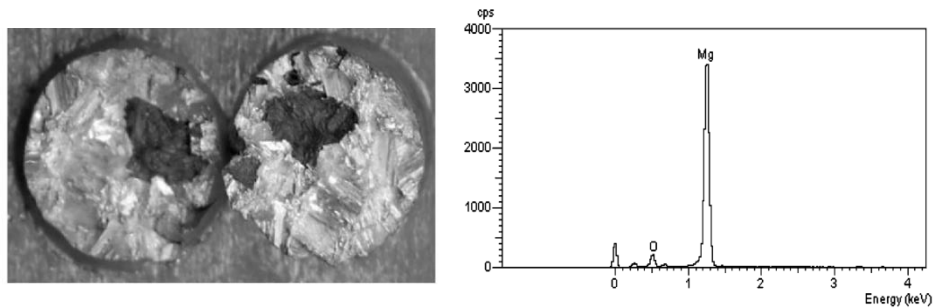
The fracture surface showing the oxide film defect located symmetrically on both sides of tensile test bar[5].
